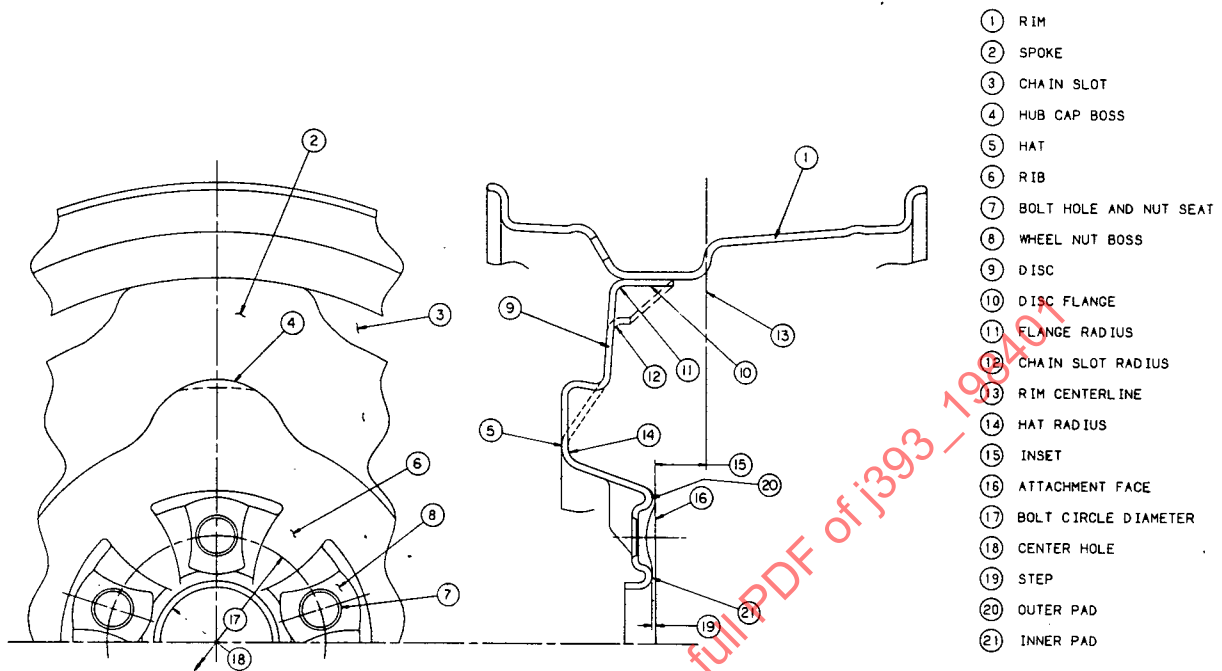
Nomenclature, Stamped Disc Wheel
